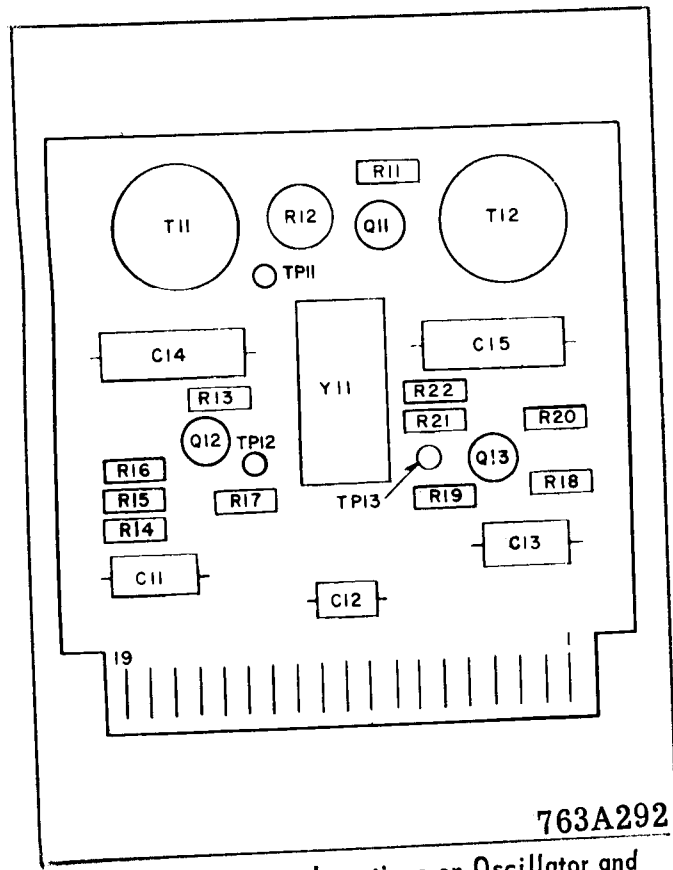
Component Locations on Oscillator and Mixer Printed Circuit Board.
